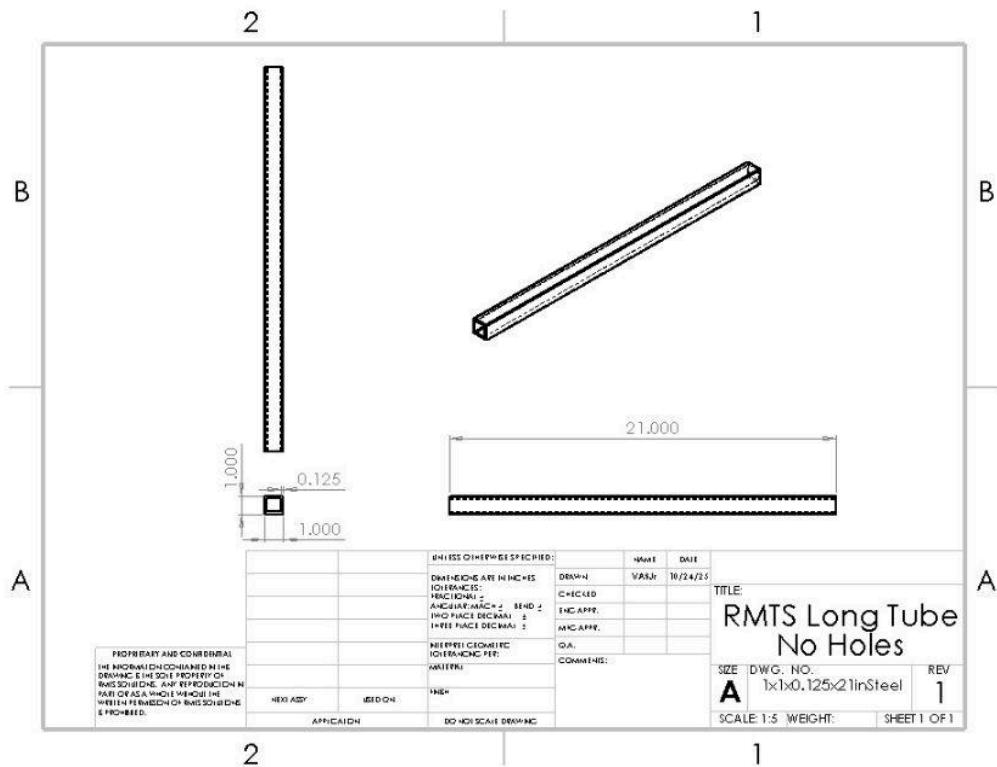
Figure X: Drawing of 1"x1"x1/8" square steel tube cut to 21 in
